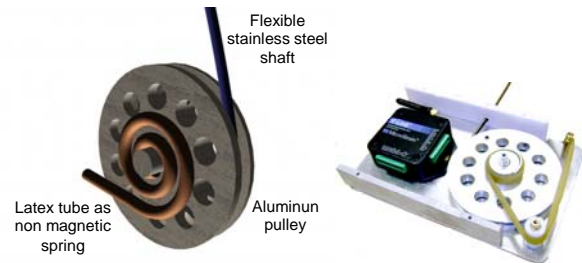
a) Stainless flexible shaft + Latex tube as spring
